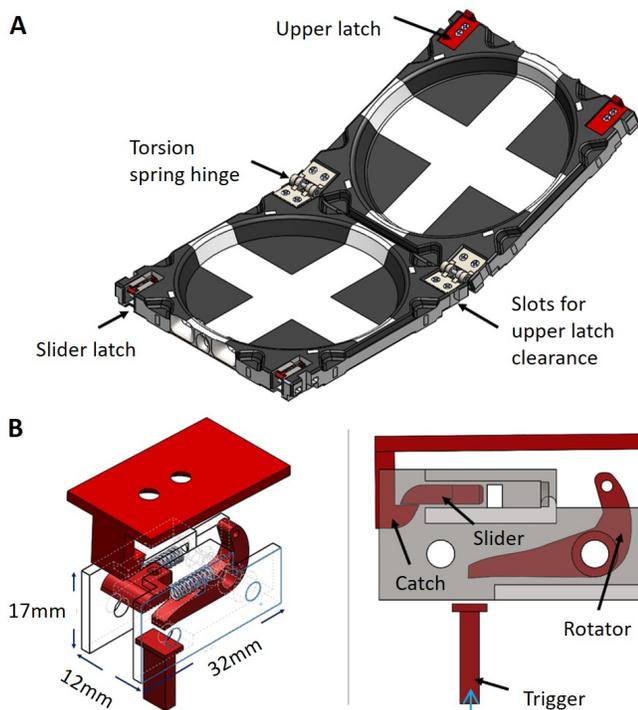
Expandable brick (A) and trigger mechanism (B).
